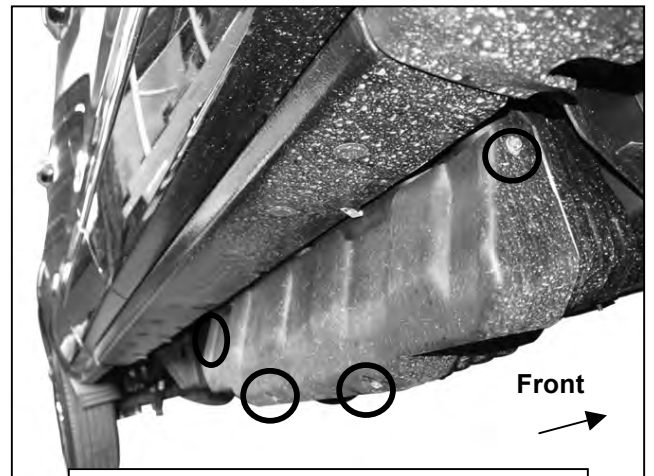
07-16 Passenger side front pictured with DEF tank cover. Remove (3) hex bolts to remove cover
